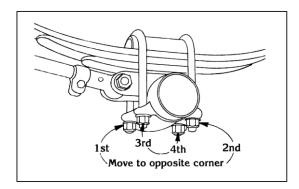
Spring Suspension Axle Clamp Tightening Sequence
